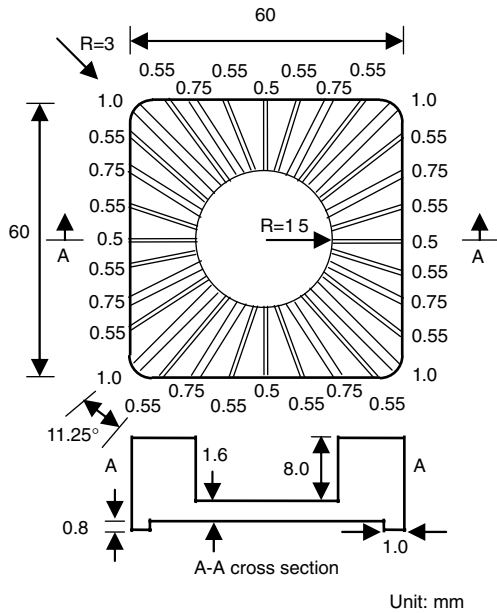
The dimensions of the heat sink with 32 cooling fins
